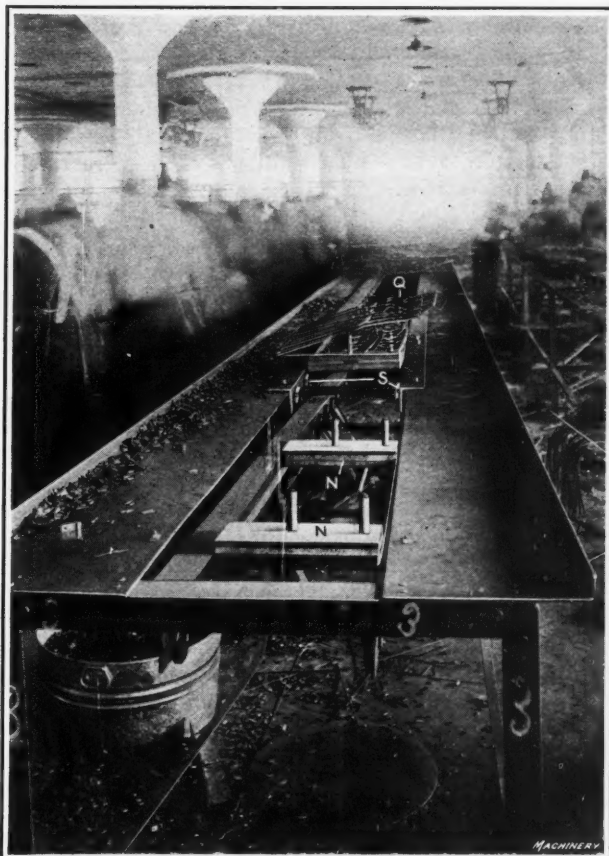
Progressive methods of assembling are used in manufacturing automobile cushion springs. In the Detroit Wire Spring Co.'s factory, the Palmer-Bee Co. has installed equipment for handling this work. The spring frames are placed on small trucks, on which they are carried along the bench from man to man, and the various parts of the spring are put together
